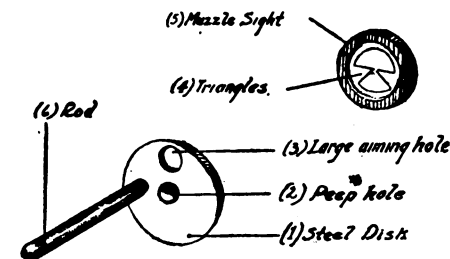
Bore sights for 37-mm. gun, M1916
